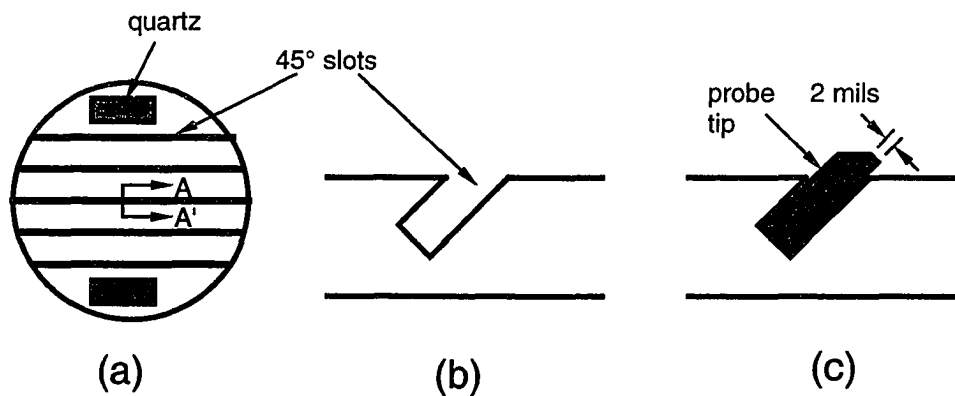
Angle lapping process: (a) top view of the lapping fixture, (b) cross sectional view of AA', and (c) final shape of lapped probe tips.
